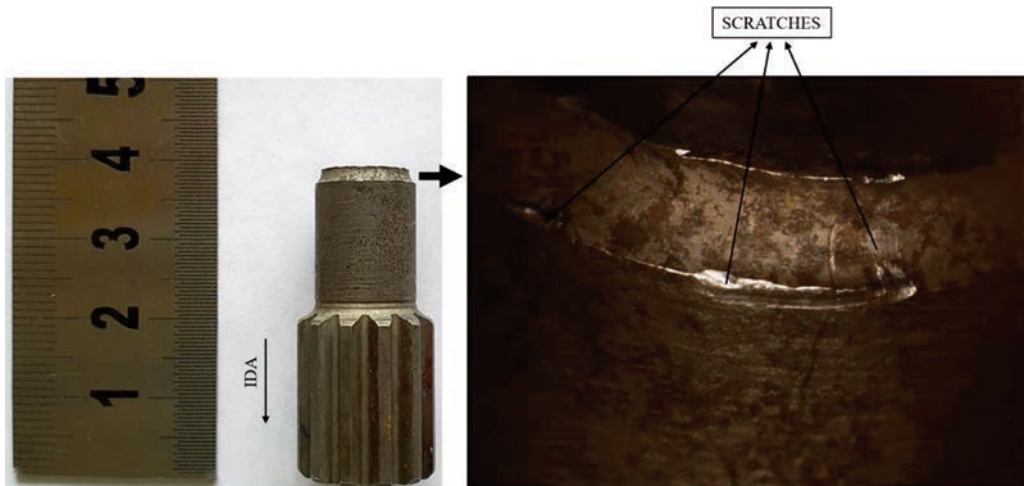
The Fretting and Scratching in the Fracture Zone of Non-Corroded Side of the Shaft.
